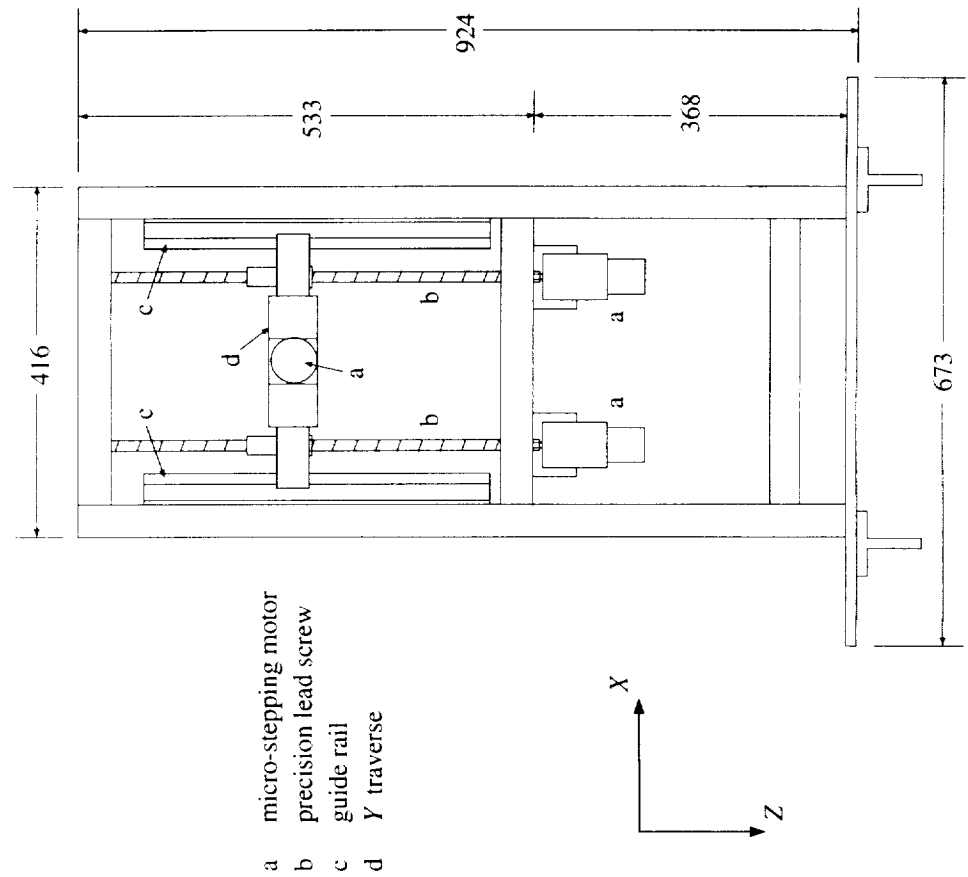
Front view of traverse carriage. All dimensions in millimeters.
